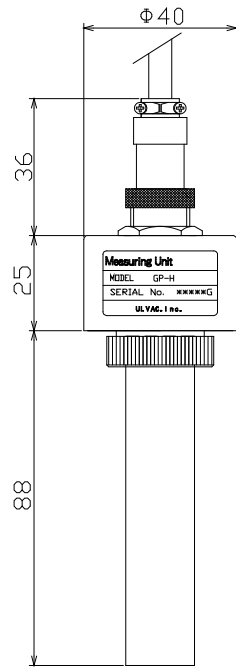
Dimensional drawing for measuring unit GP-H
